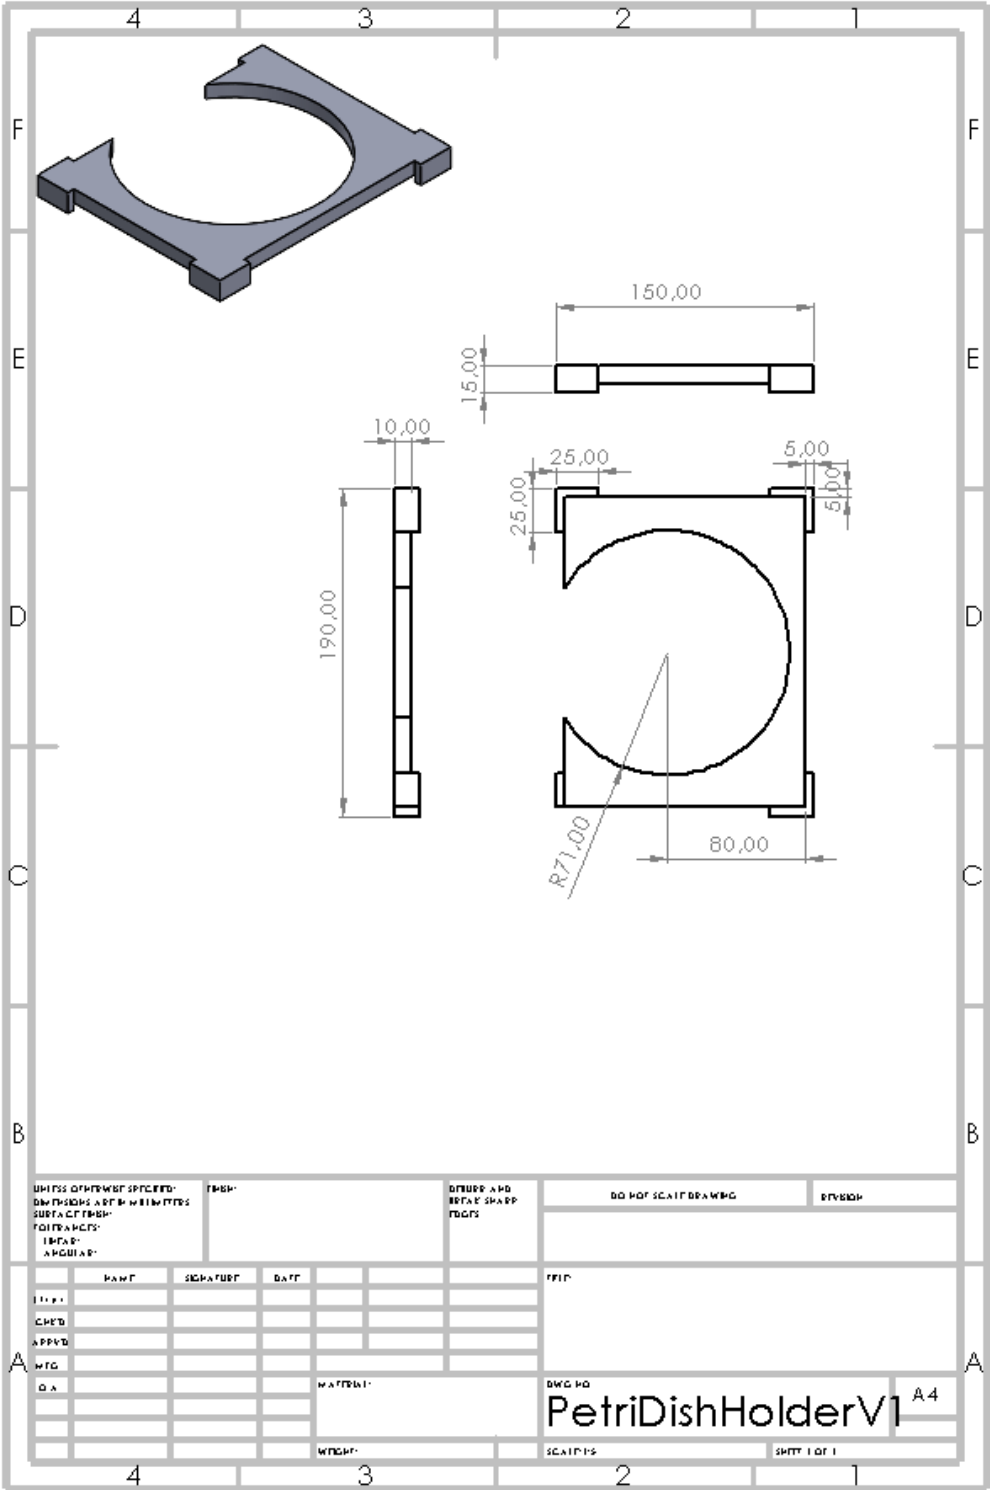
Technical drawing of the petridish holder of the hydrodynamic test-setup.
